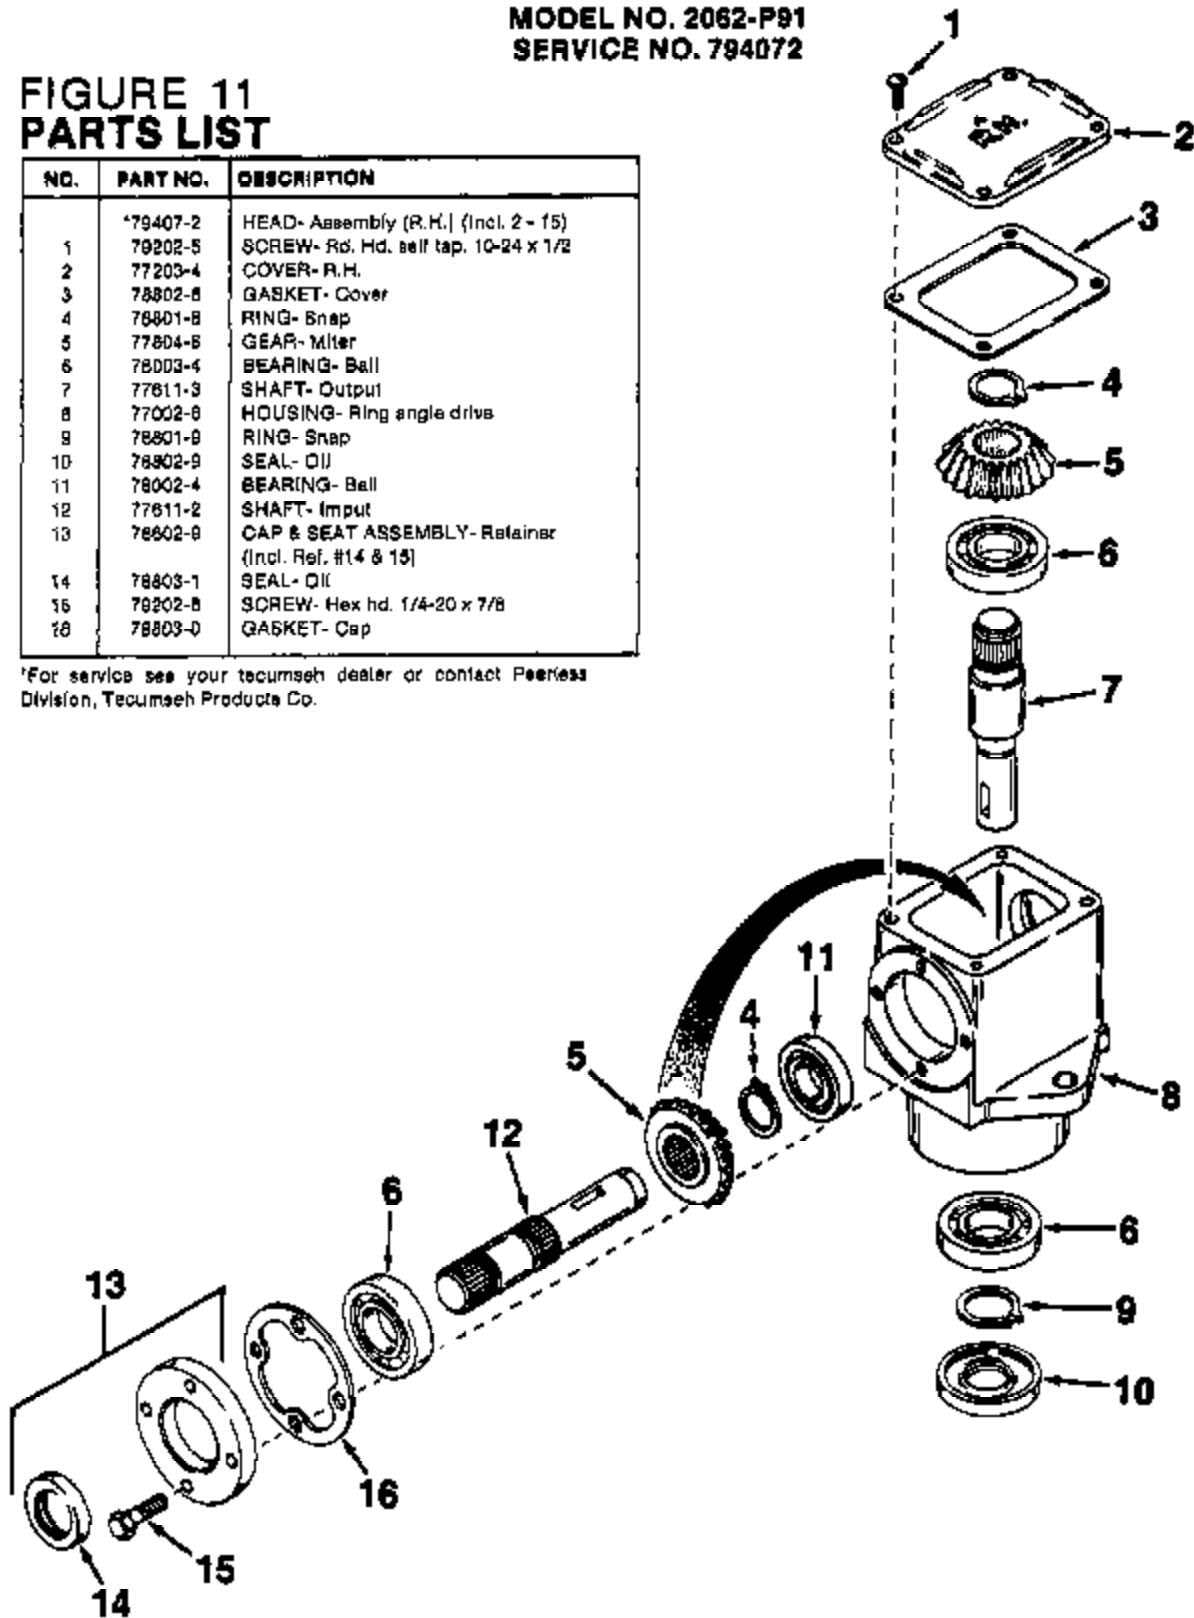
RIGHT ANGLE DRIVE HEAD ASSEMBLY
